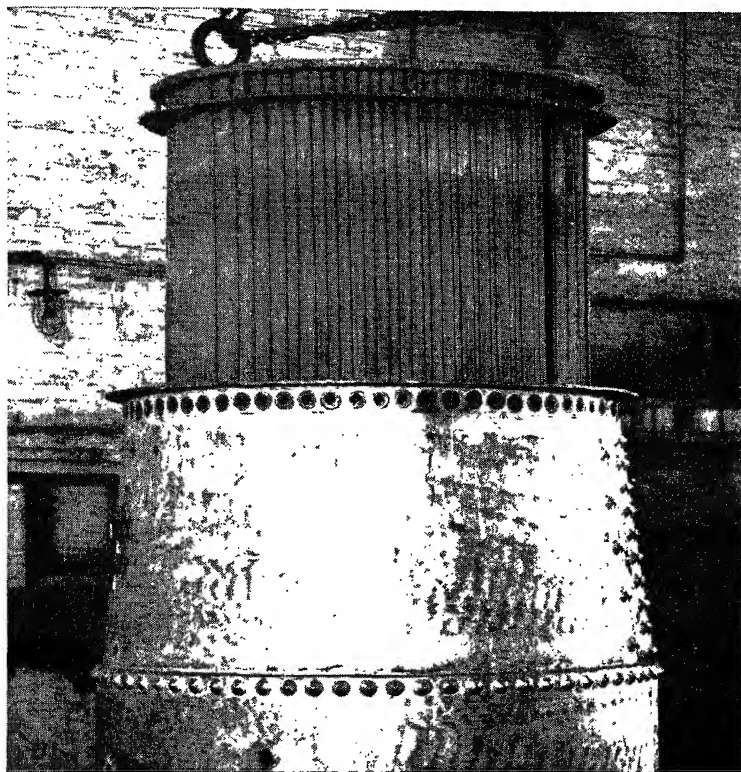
Boiler with copper tubes joined to headers with silver brazing alloy.
